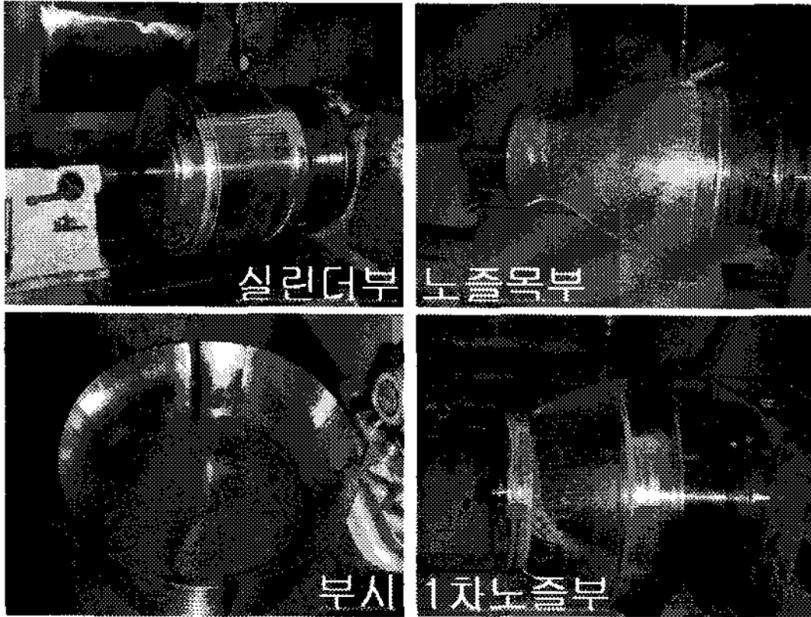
Inner Jacket (cylinder, throat, 1st nozzle)& Bush
